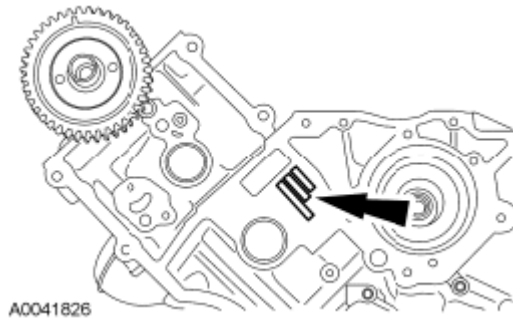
Locating Main Bearing Code Label Location (Engine Block)
